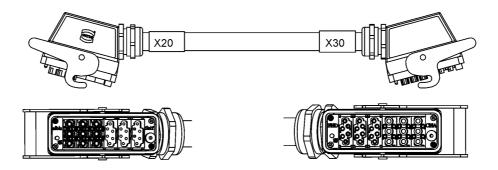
Connecting cable, motor cable, X20 - X30
